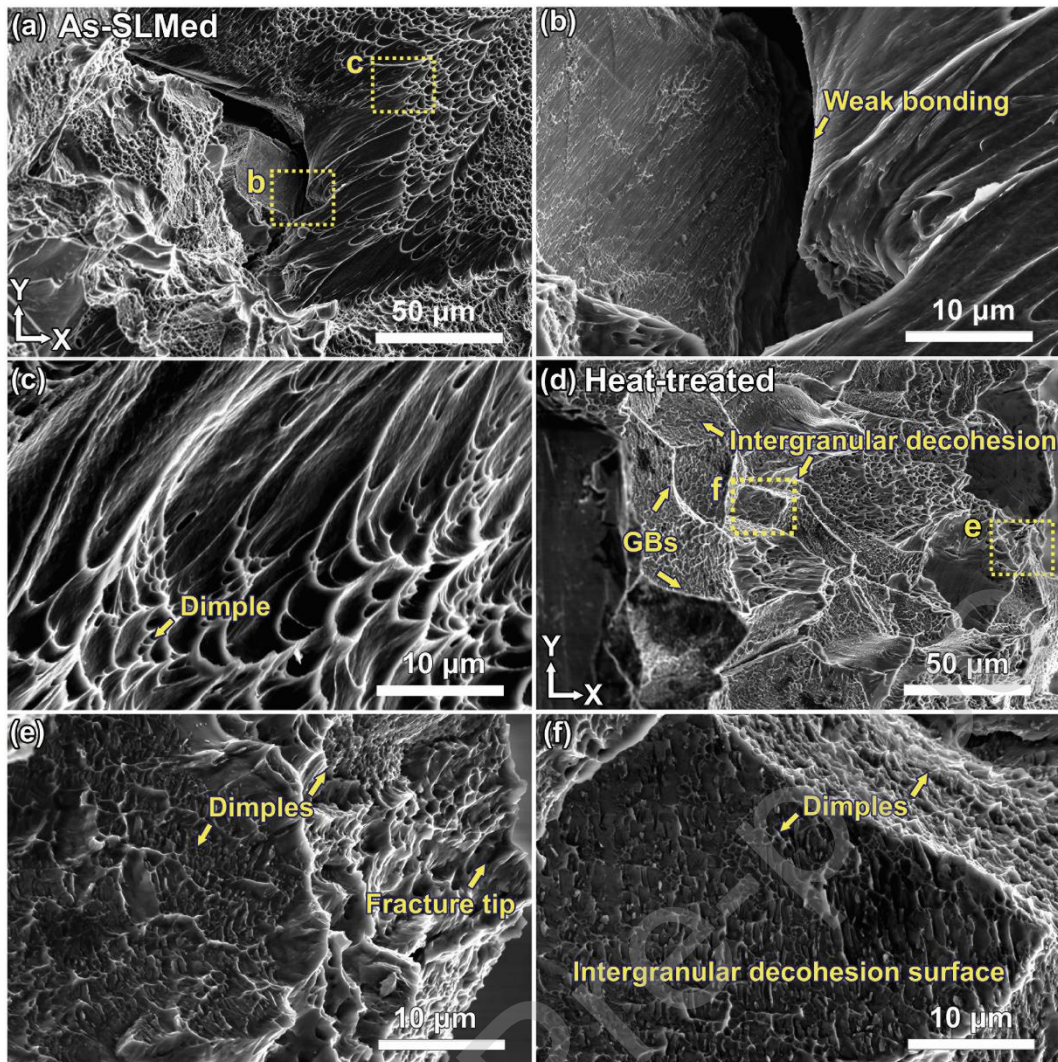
Microstructure of fracture surfaces at the longitudinal section (side view from fracture) after tensile test: (a)-(c) as-SLMed Ti-35Nb sample, and (d)-(f) heat-treated counterpart.
